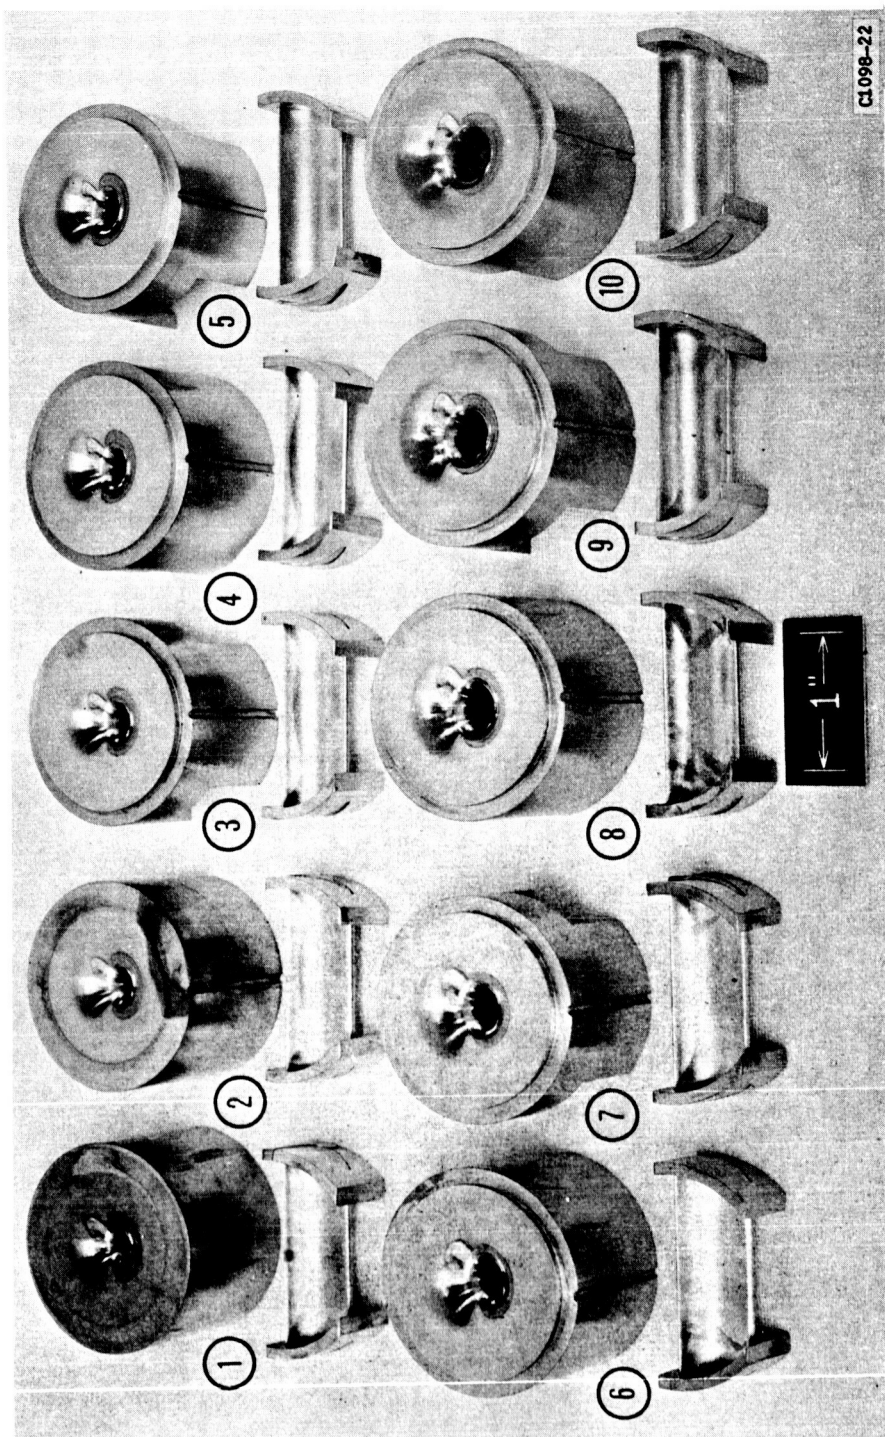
Mo-TZM Alloy Turbine Simulator Nozzles, Blade Specimens and Specimen Holding Pads From the Prototype Corrosion Loop Following 5000-Hour Exposure to Potassium. (Orig. C66050510)
